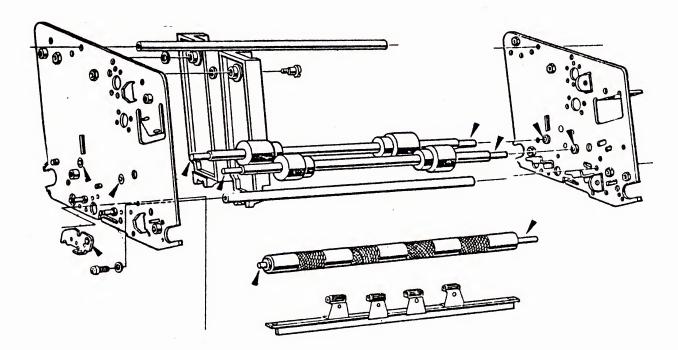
Lubrication Points — Sheet Feeder Shafts
